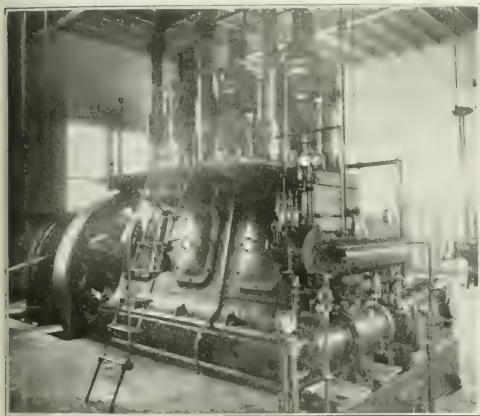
225-hp Diesel Unit, Showing Valve Mechanism, Direct-Connected Compressor, etc.
